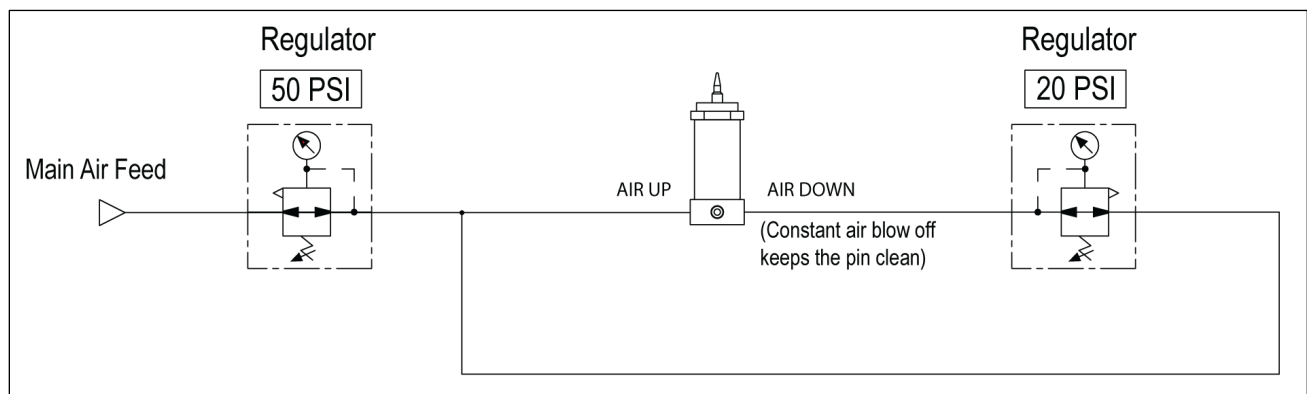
Pneumatic Connection Diagram for VeriFast™ IA Weld Body with Non-Retractable Pin (Not applicable to Clamp Mount Assembly)
